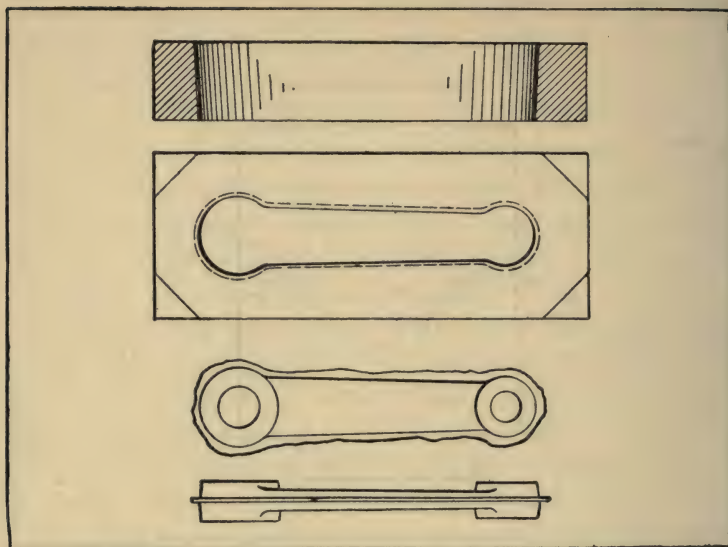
A ROUGH FORGING AND ITS TRIMMING DIE
